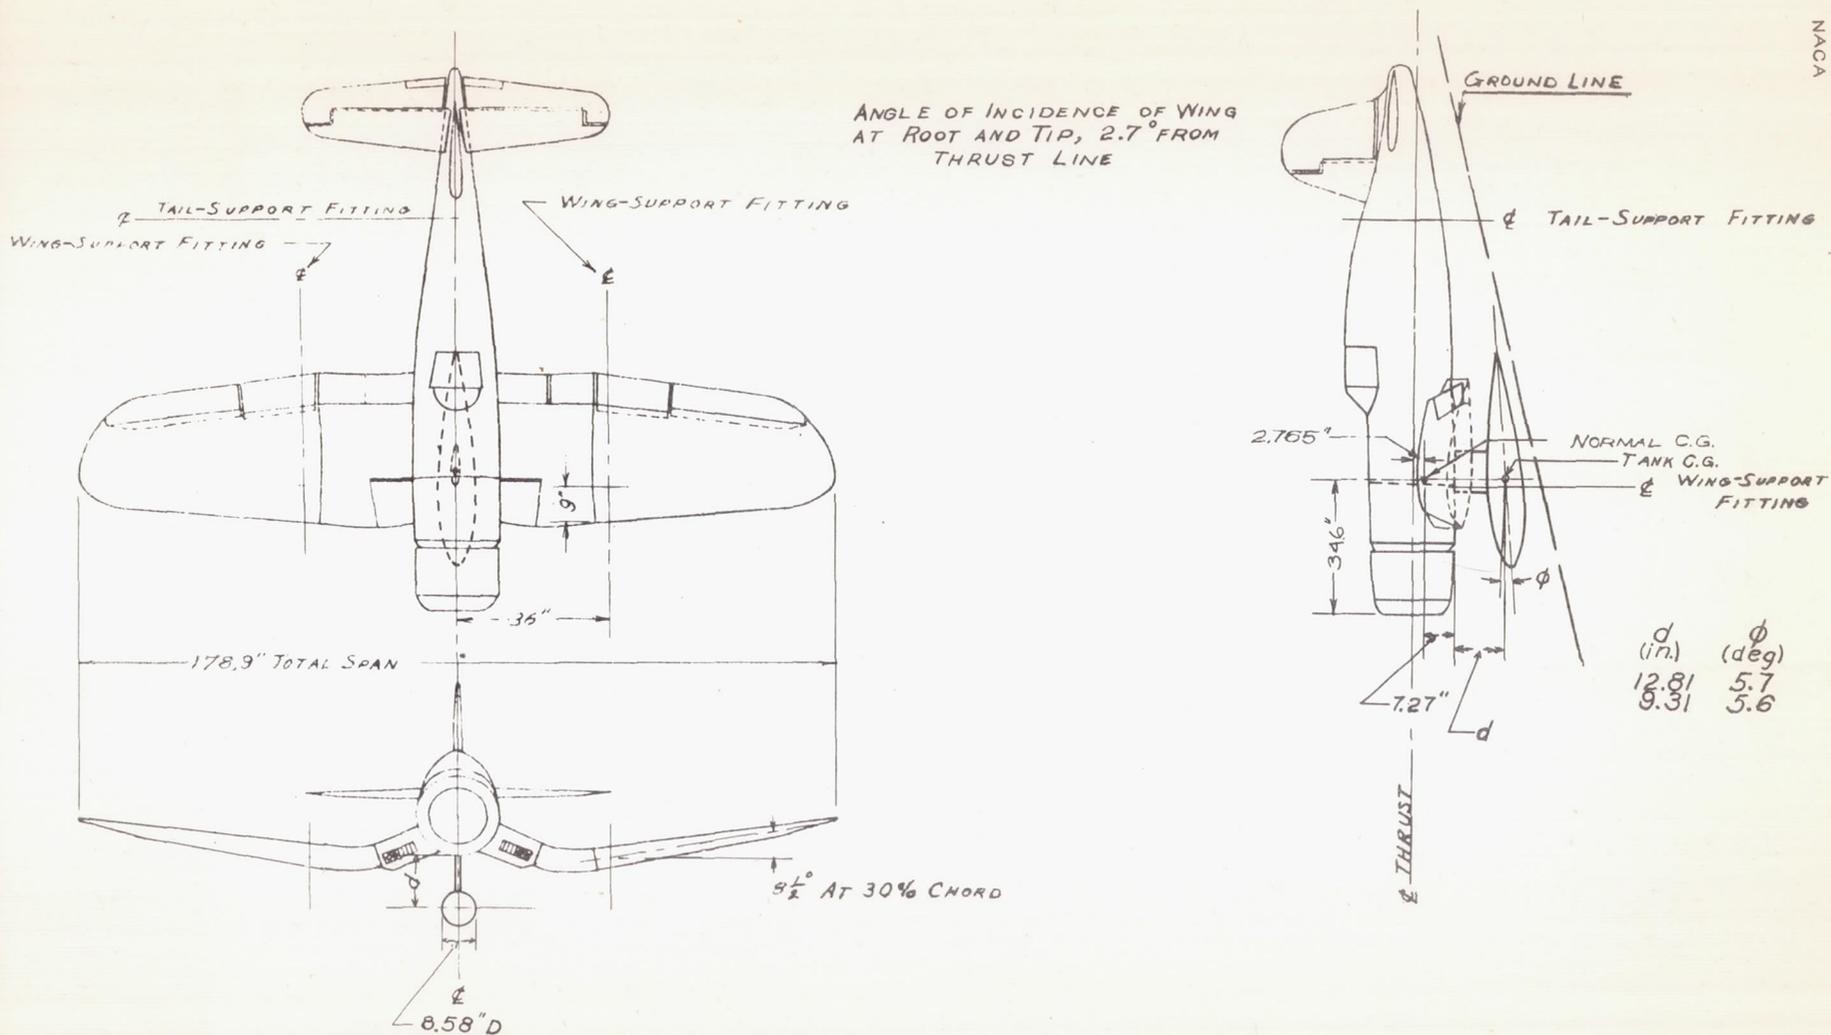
Plan and elevation views of the airplane model with the small circular external auxiliary fuel tank for the fuselage.
